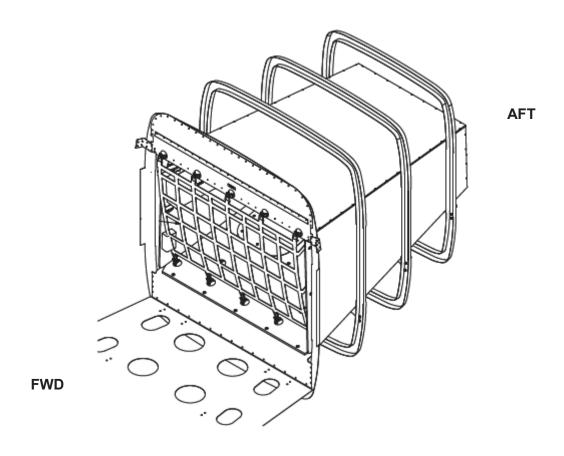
Extended Baggage Configuration -01 (see drawing 1008423)
